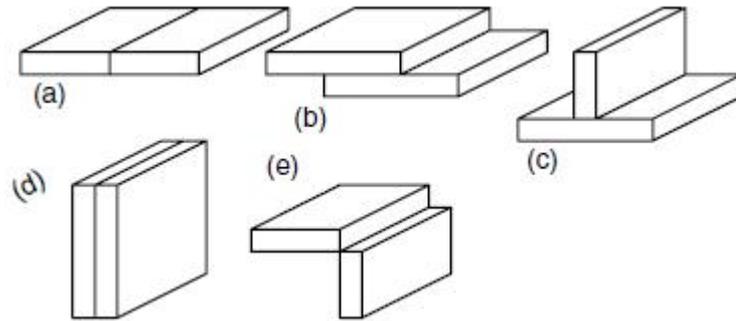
Five basic types of weld joint designs. a) butt joint b) lap joint c) T-joint d) edge joint e) corner joint (Kou, 2003)
